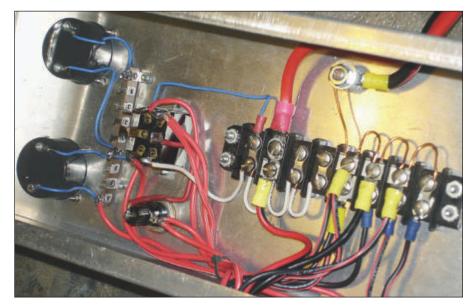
Internal wiring of the control box using heavy lugs, both crimped and soldered.
